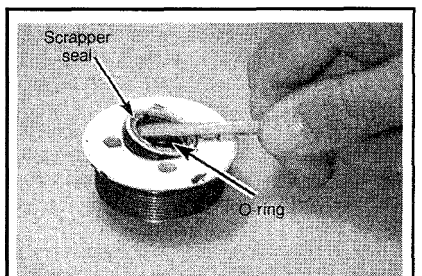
Carefully, pry the scraper seal out of the end cap, then remove the O-ring
